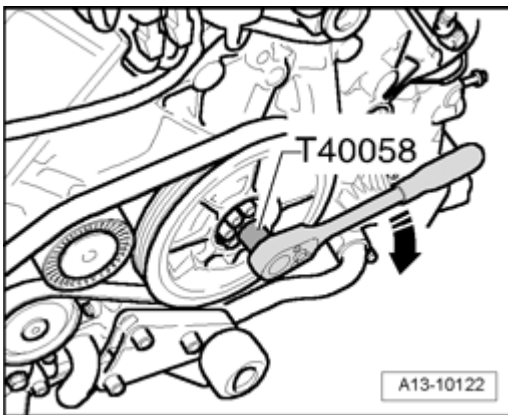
Using Socket T40058 To Rotate Crankshaft In Direction Of Engine Rotation To TDC Ignition Timing
